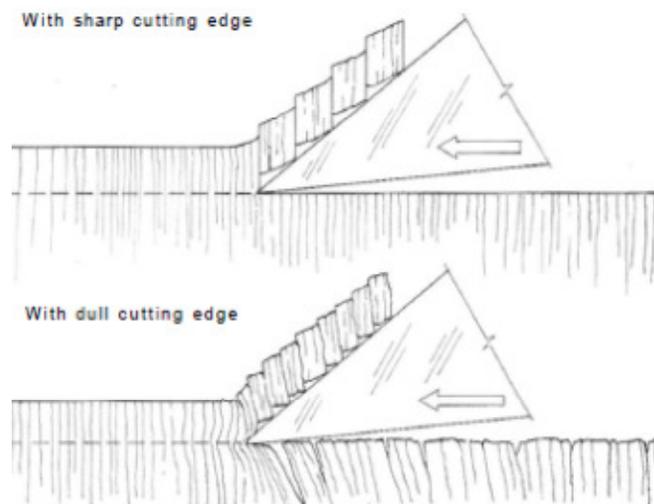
90° - 90° cutting action: If the tool is dull or a thick chip is taken, damage may extend deep into the end-grain surface [4].
